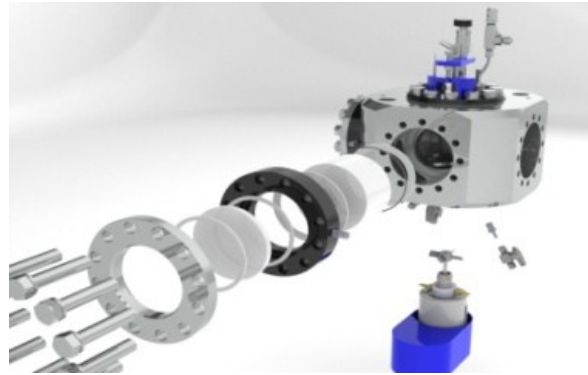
Cartoon reconstruction of sealing gaskets and O-rings
